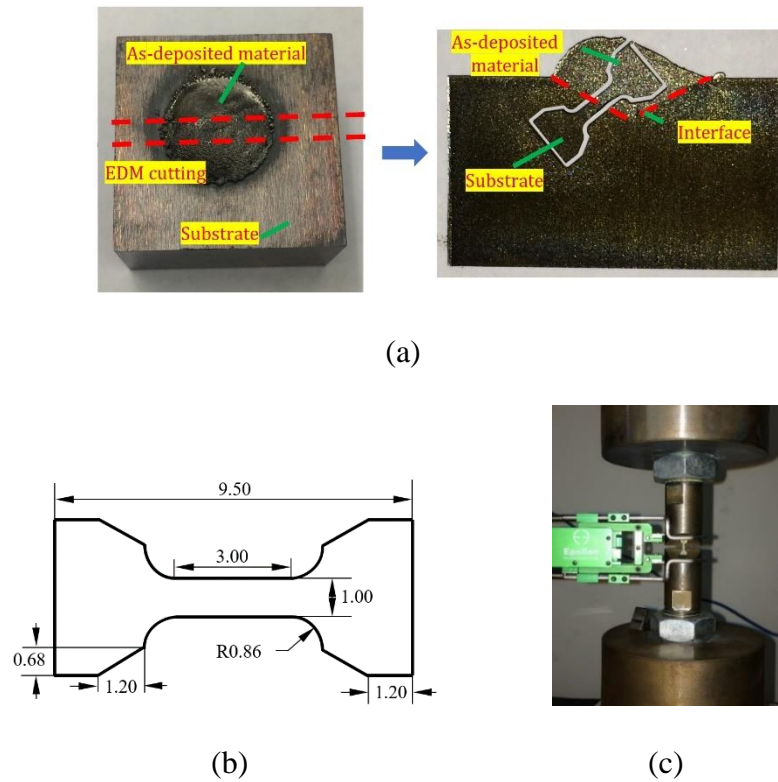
Tensile test specimen preparation. (a) Obtained tensile specimen over a sectioned substrate; (b) Dimensions of the mini-tensile specimen (Dimensions in mm, 1 mm in thickness); (c) Tensile test setup
